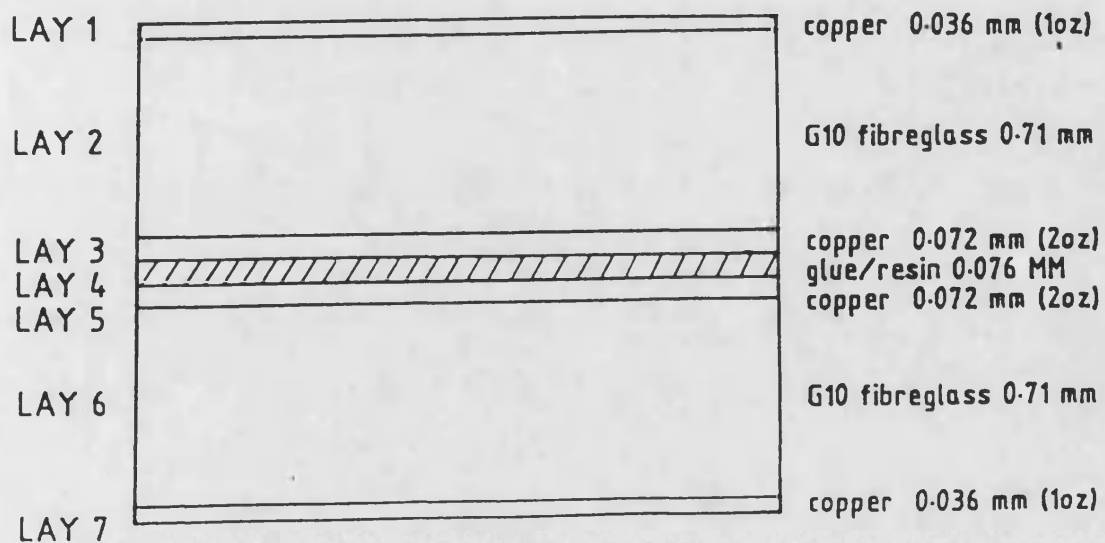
CONSTRUCTION OF TEST PCB
